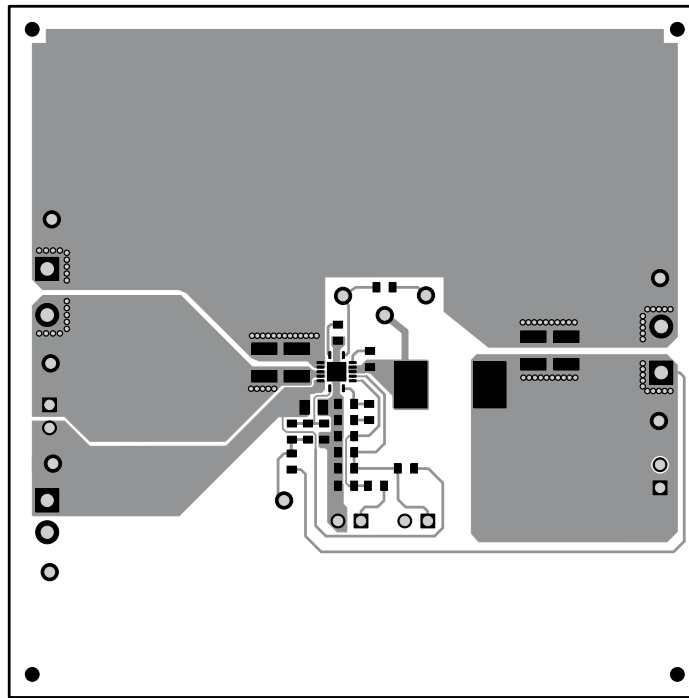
TPS54821EVM-049 Top-Side Layout
